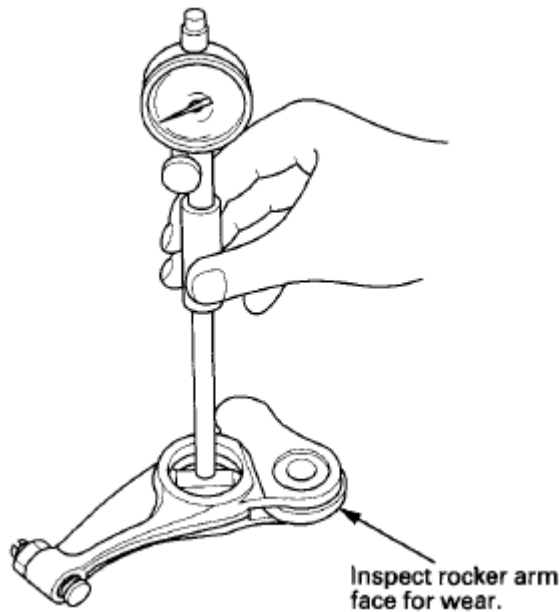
Measuring Inside Diameter Of Rocker Arm
